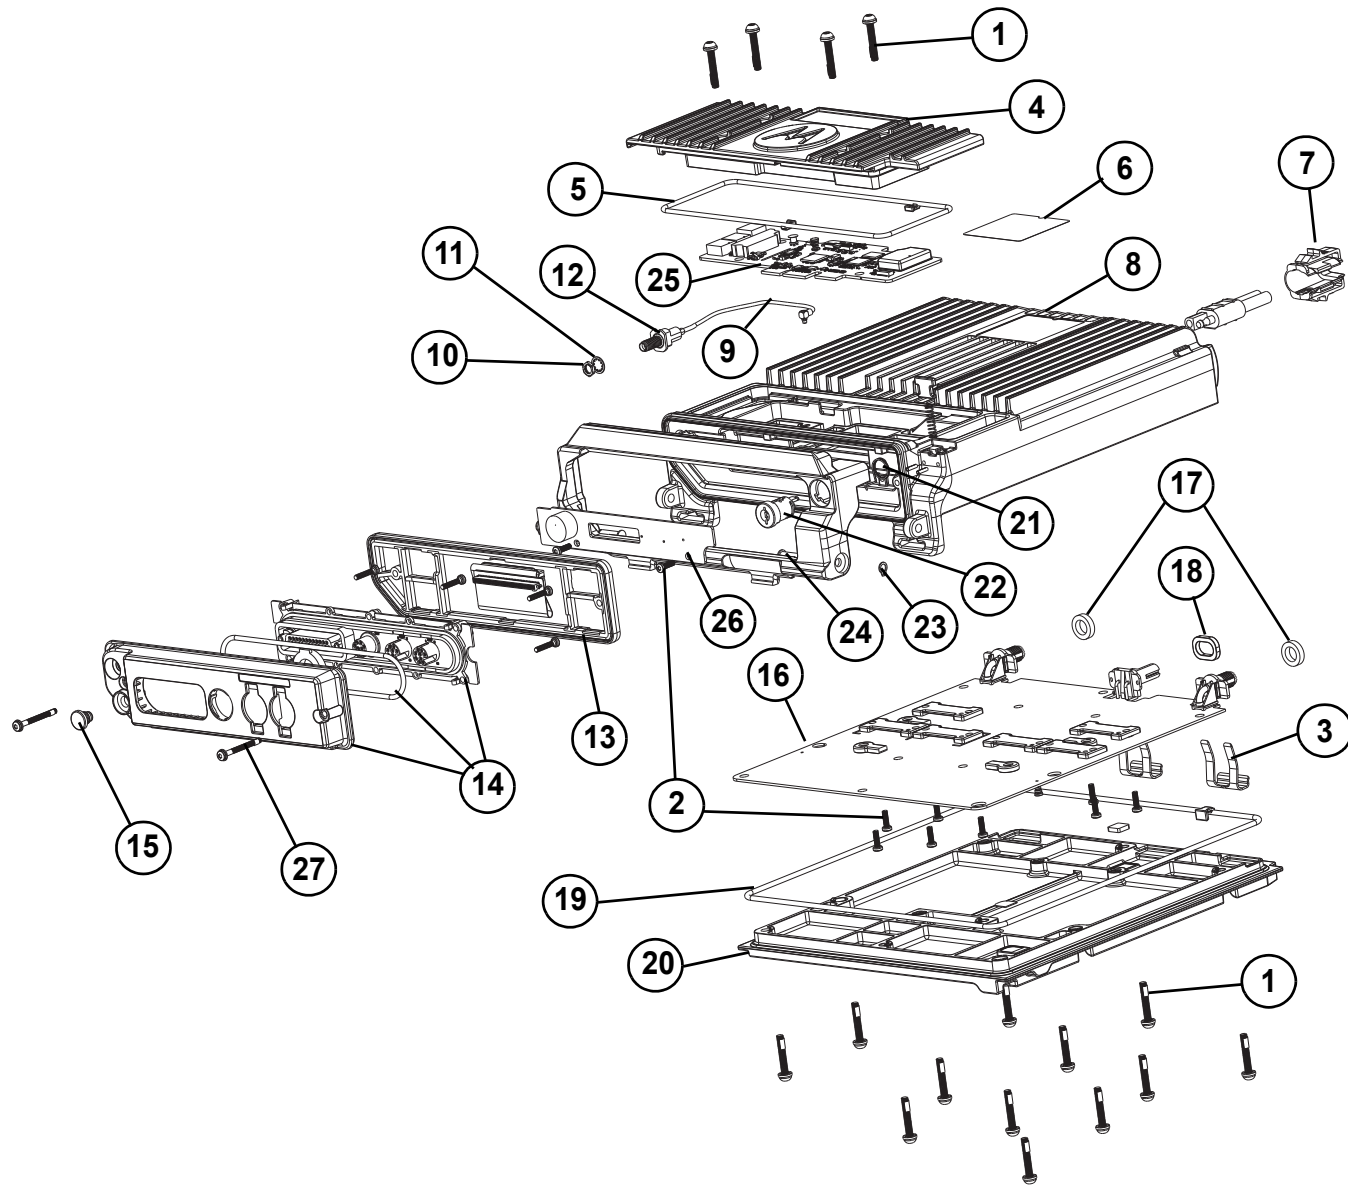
APX 5500 / 6500 / 7500 / 6500 Li 100 W Remote Mount Radio Exploded View
